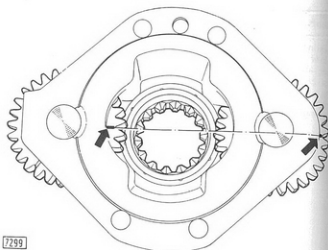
Refitting Speed Reduction Idler Gears (Reference Marks Lined-up)
